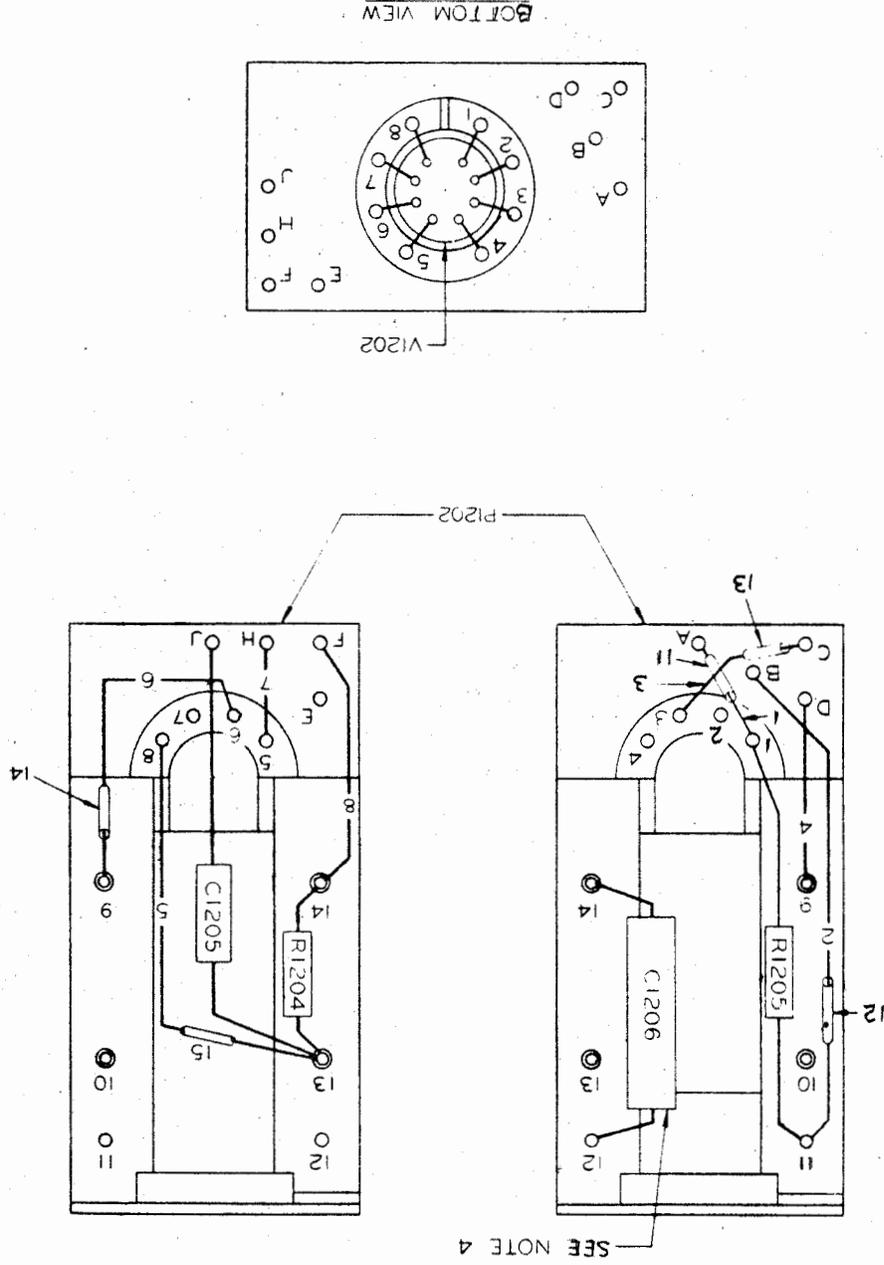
Crystal Calibrator Plug-in Unit, Z1202
